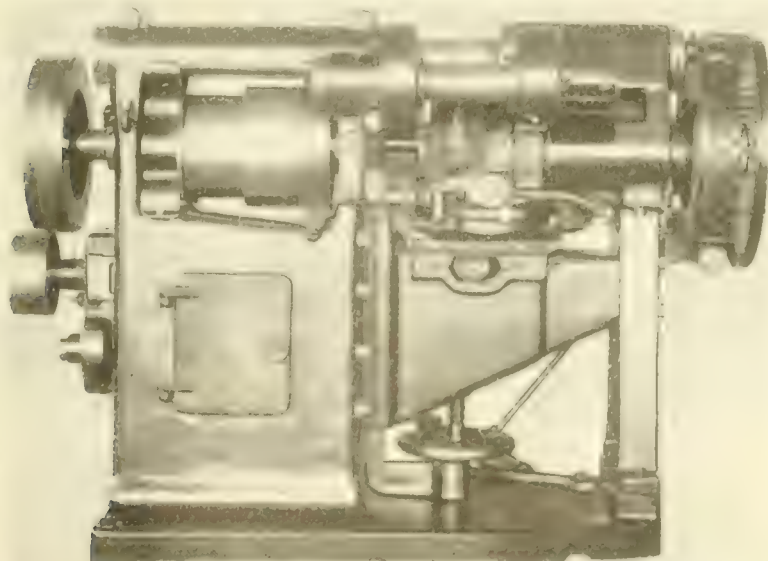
GENERAL VIEW OF THE SPECIAL MACHINE
